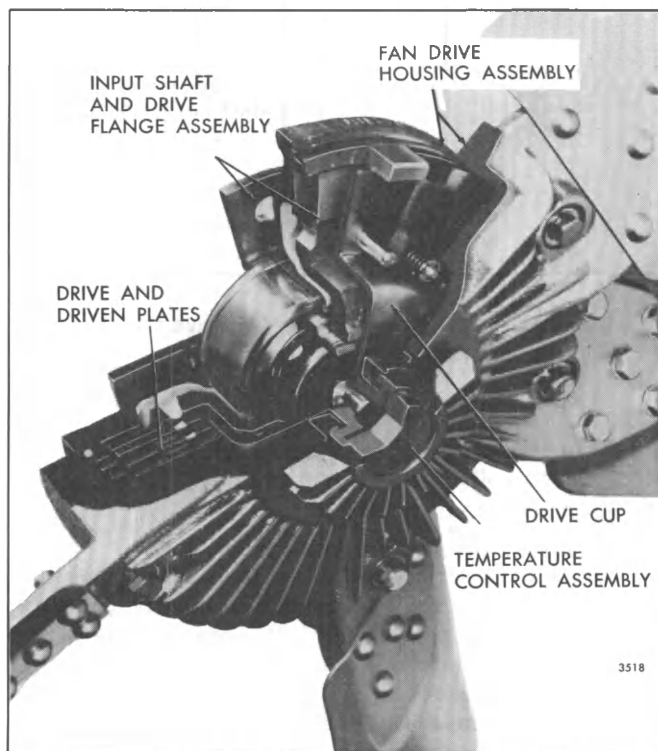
Thermo-Modulated Fan Drive Assembly
